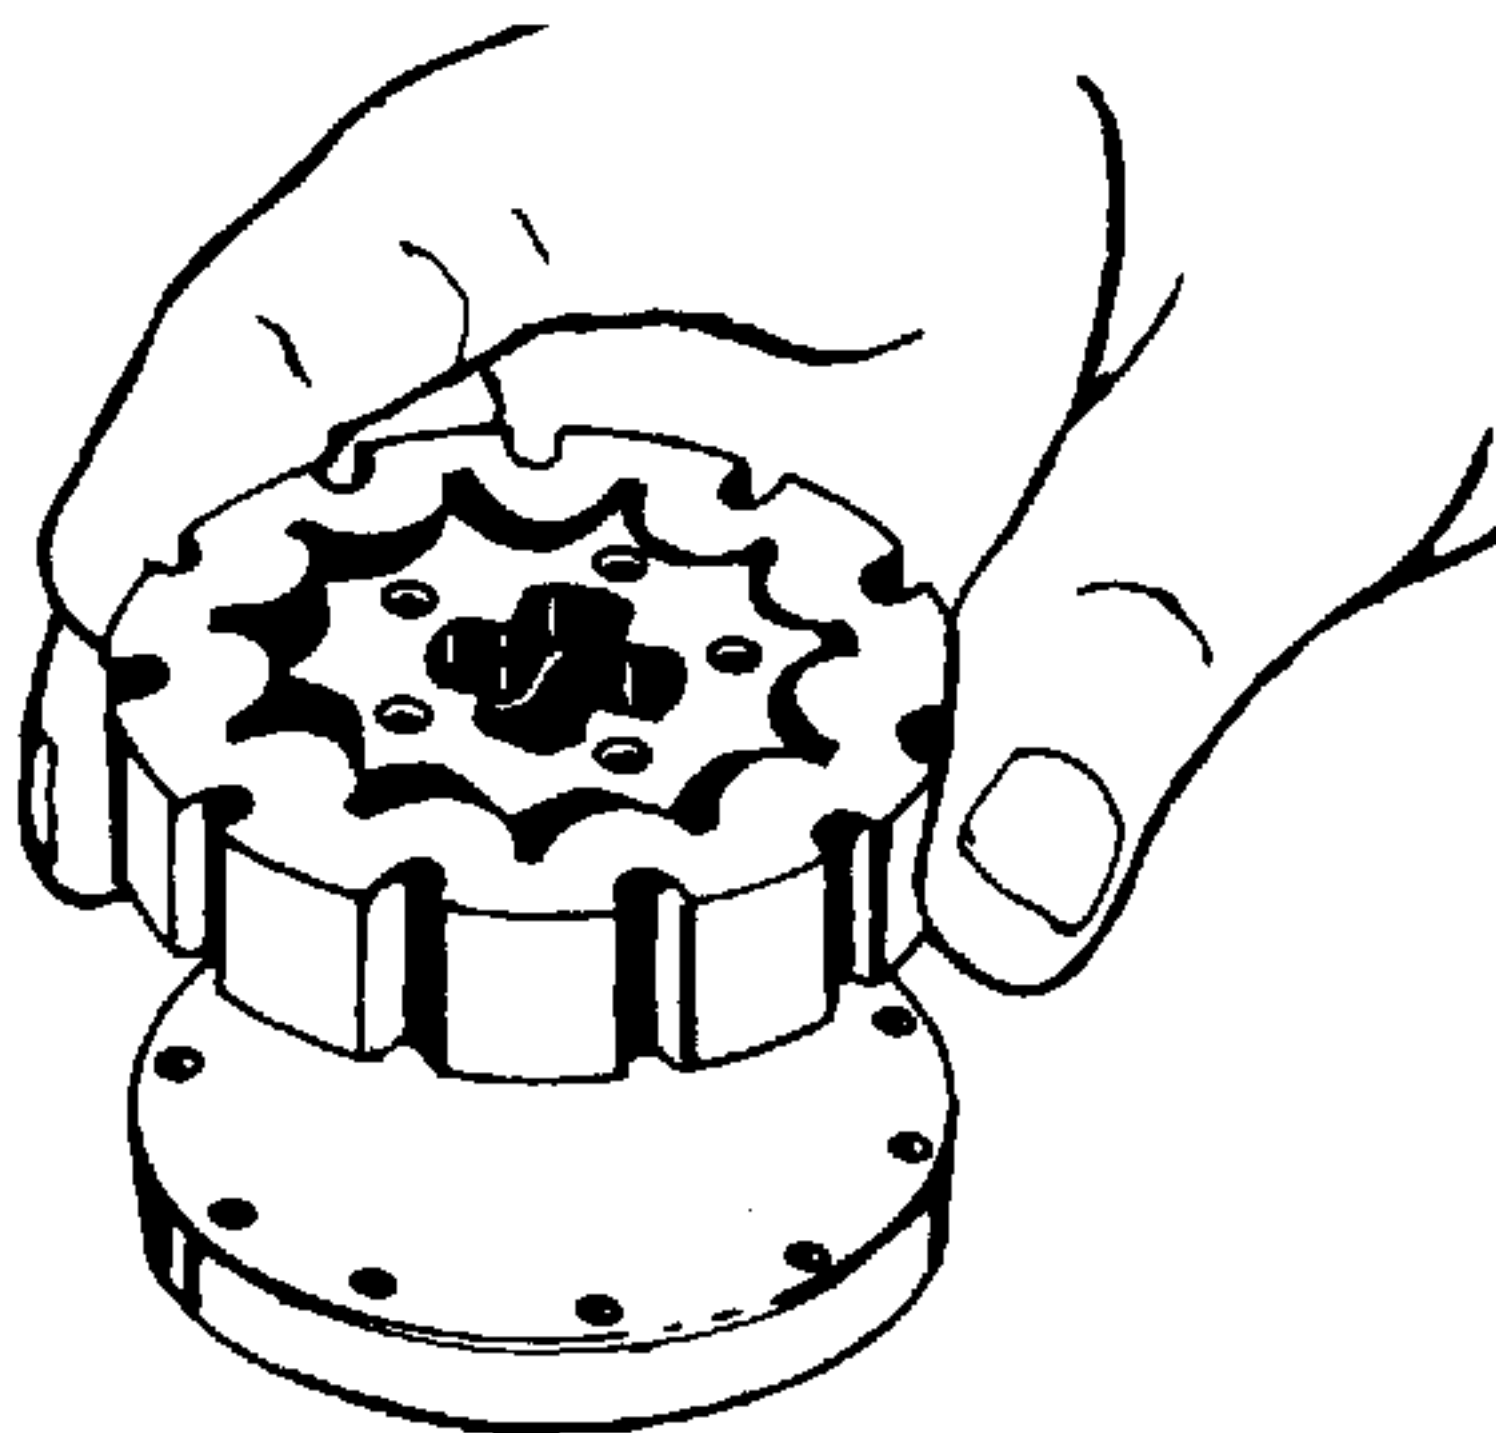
Aligning Needle Roller Holes and Screw Relief Slots.
